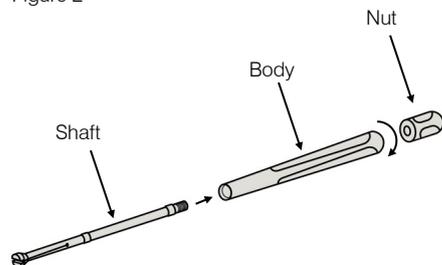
Assembly/ Disassembly of the Impactor Assembly
